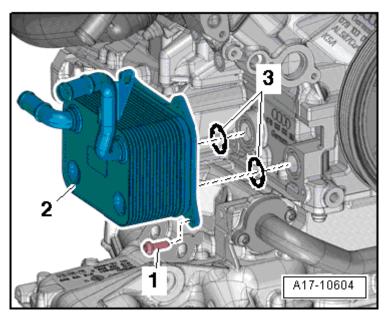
Oil Cooler Tightening Specifications & Sequence Courtesy of AUDI OF AMERICA, LLC
